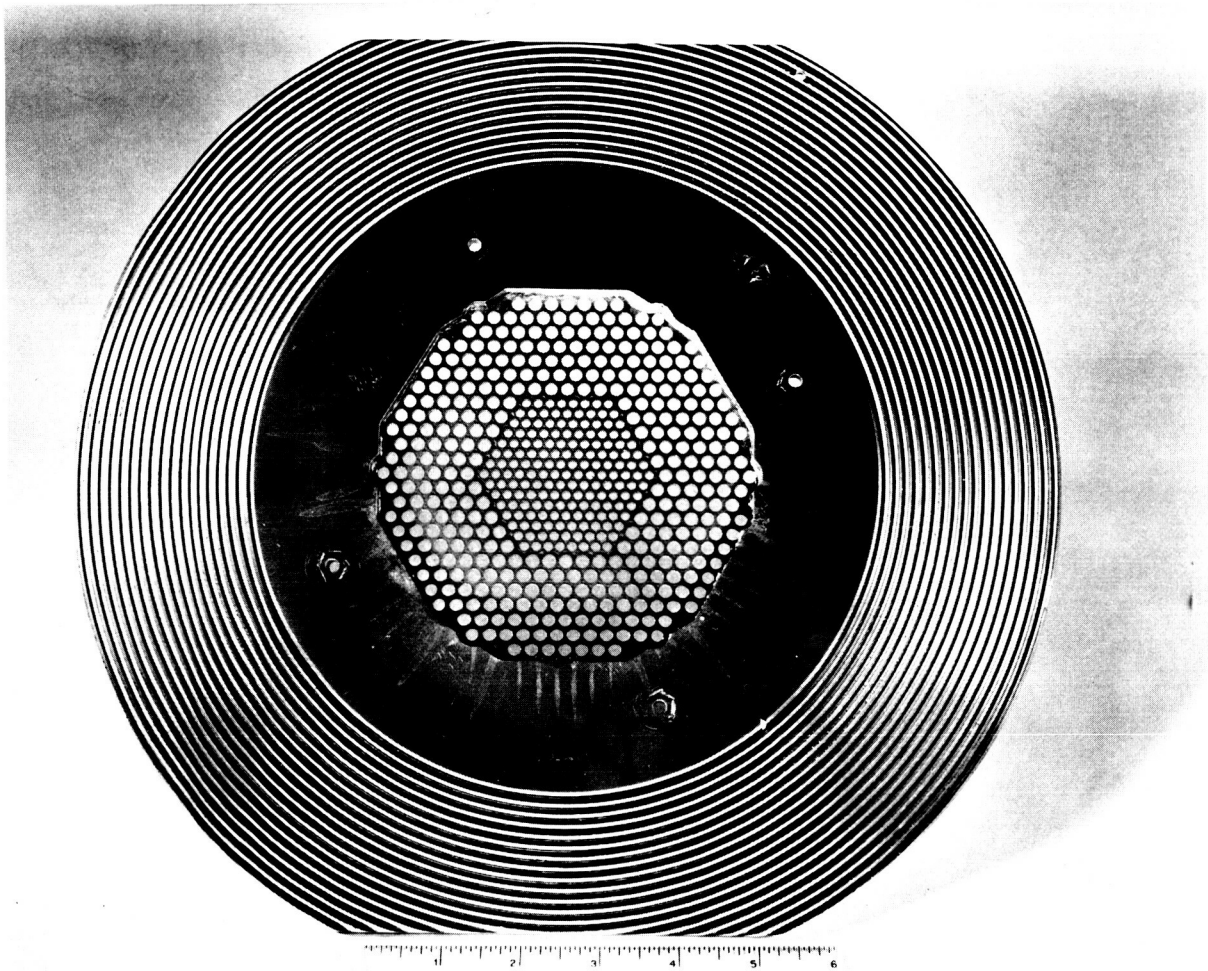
COOLED COPPER ACCELERATOR ELECTRODE
